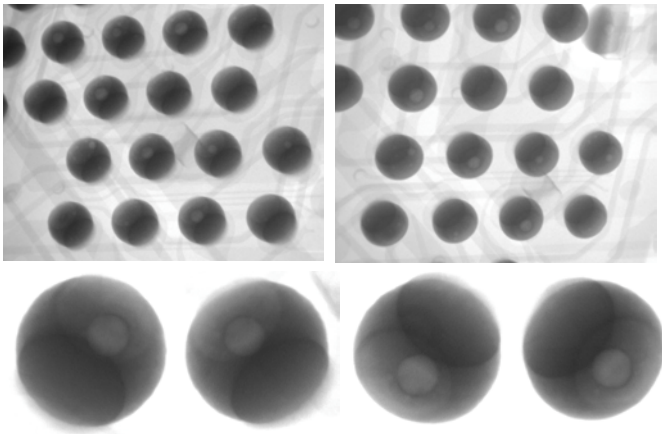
Oblique angle x-ray views taken at different orientations around a BGA (with a magnified view of a single solder ball). This shows the position of the voiding with respect to the joint interfaces. The joint interfaces can be clearly seen as ellipses within the solder ball owing to the x-ray system greyscale sensitivity.
